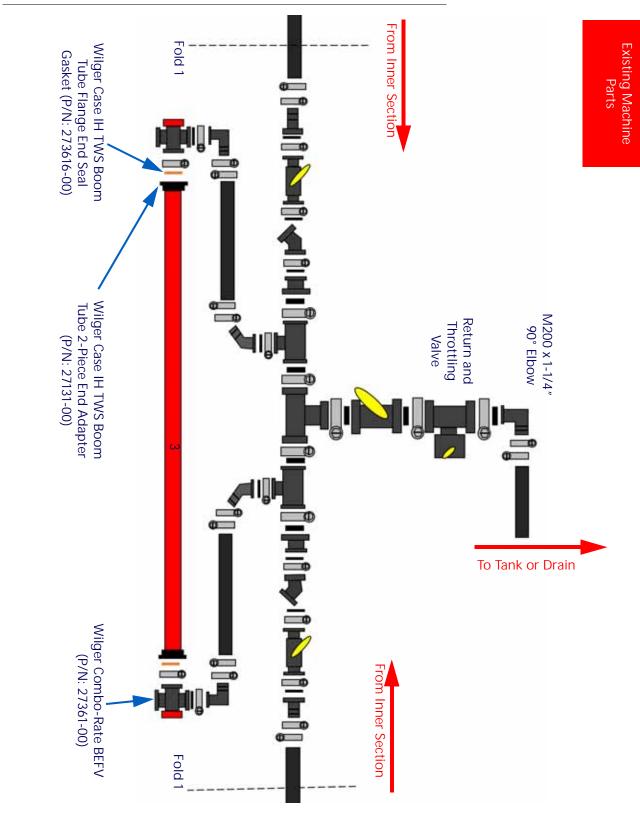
Plumbing Example for Center Boom Section for 5-Section and 7-Section Booms
